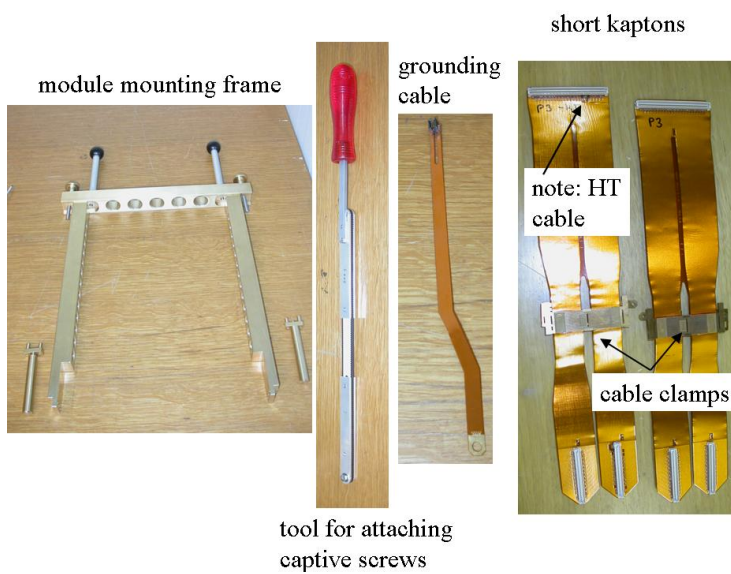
Module mounting frame, tool for attaching captive screws, grounding cable, and short kaptons
